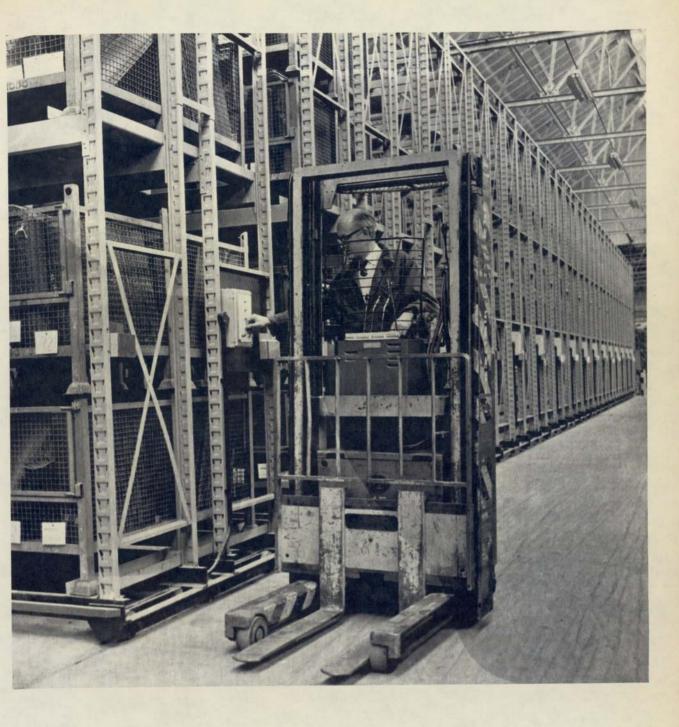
SF. PAD STORE ~ INPUT BUFFER TO BASIL SHAPE GT LINES
